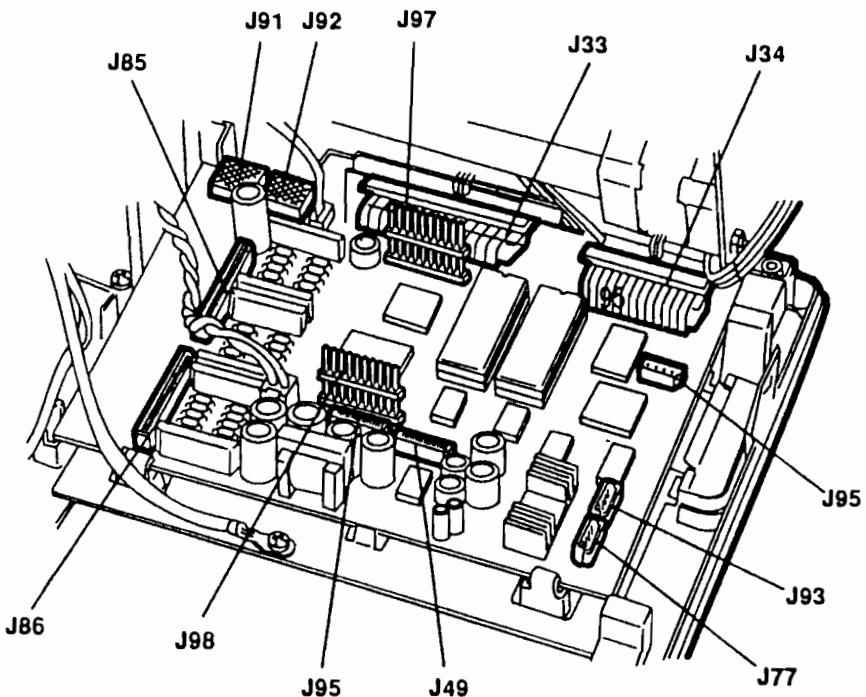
BAPR2 Main Board Installed in the Printer
